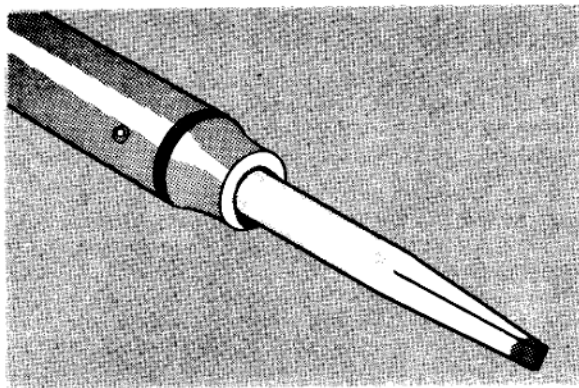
Soldering iron tip properly shaped and tinned.
